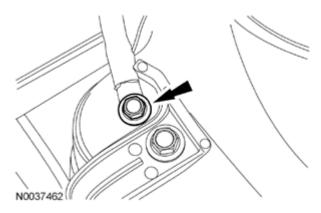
Locating Ground Wire And Bolt Courtesy of FORD MOTOR CO.
